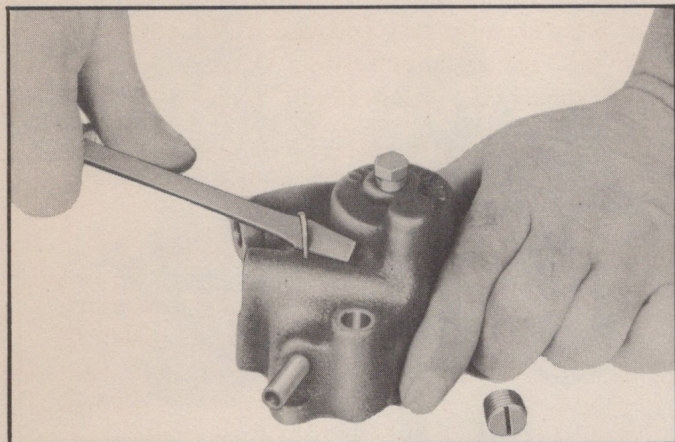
Removing 4 to 3 Valve Spring Retainer
